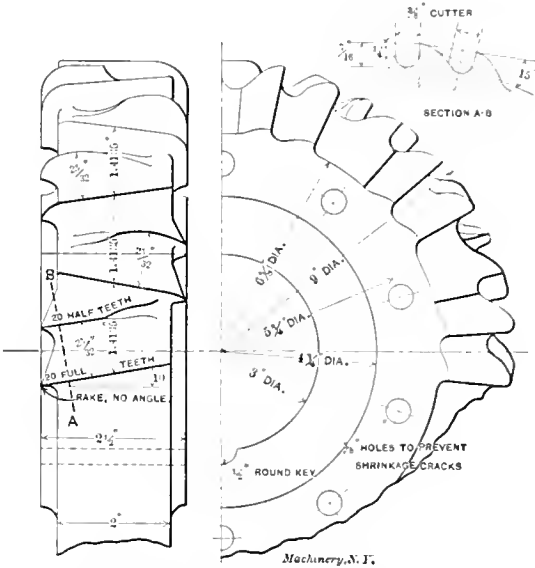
Detail Drawing of New Type of Milling Cutter.
